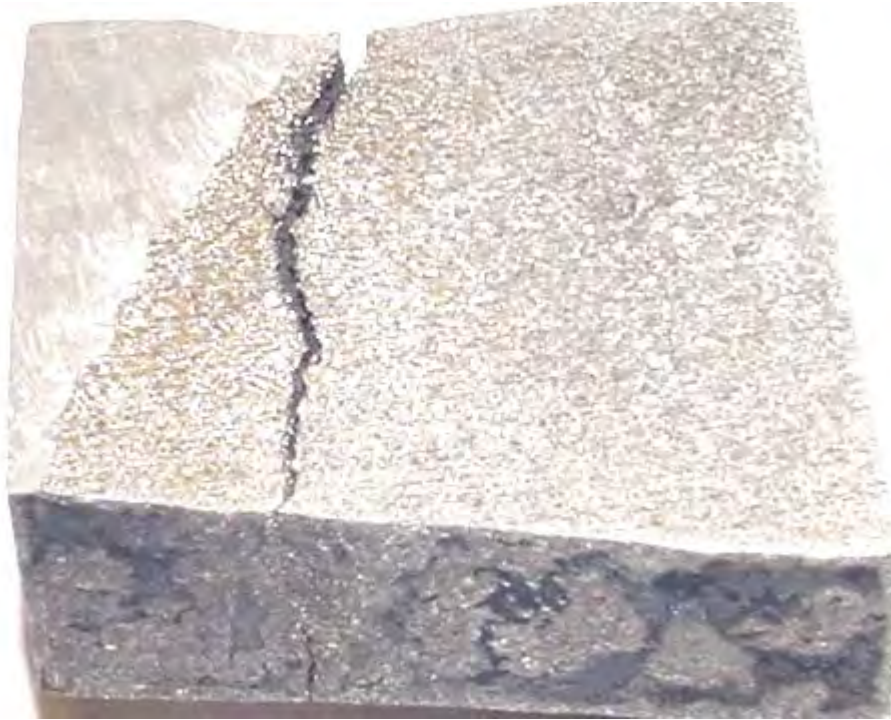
Cross section through the weldment showing the crack in Figure 3-52-2.
